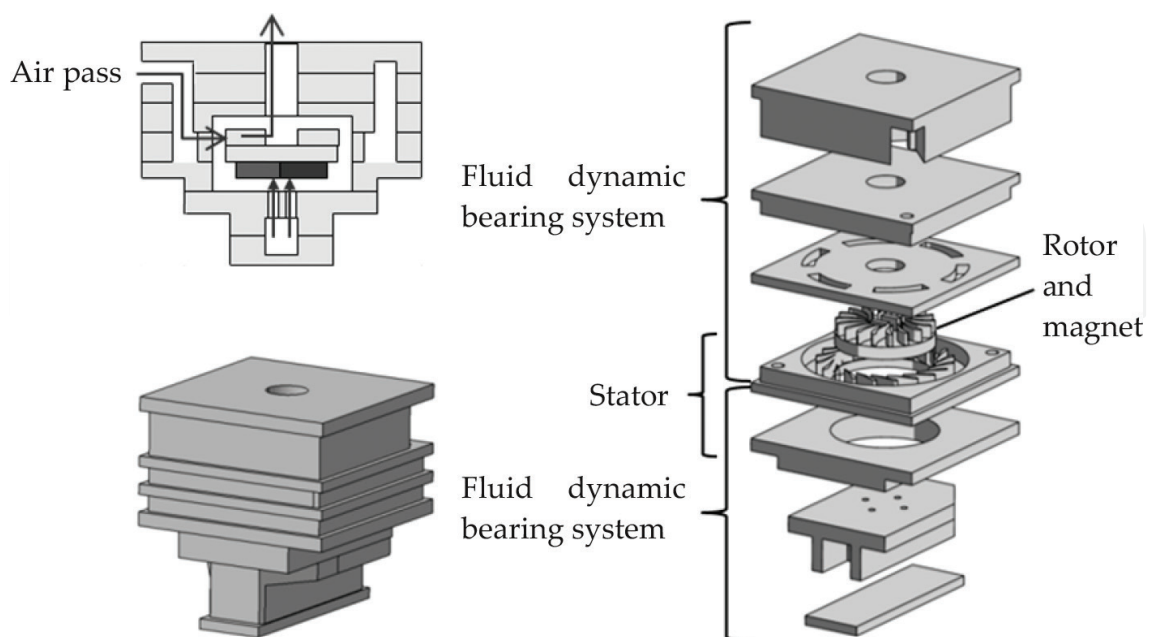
Design of MEMS air turbine structure that has flat-type rotor blade and fluid dynamic bearing system.
